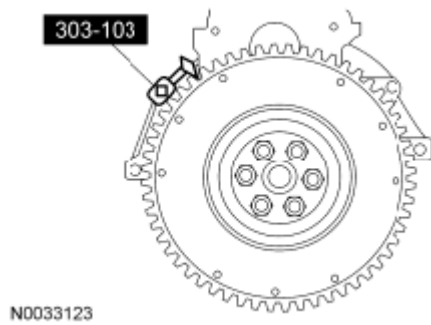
Identifying Flywheel Holding Tool On Flexplate
